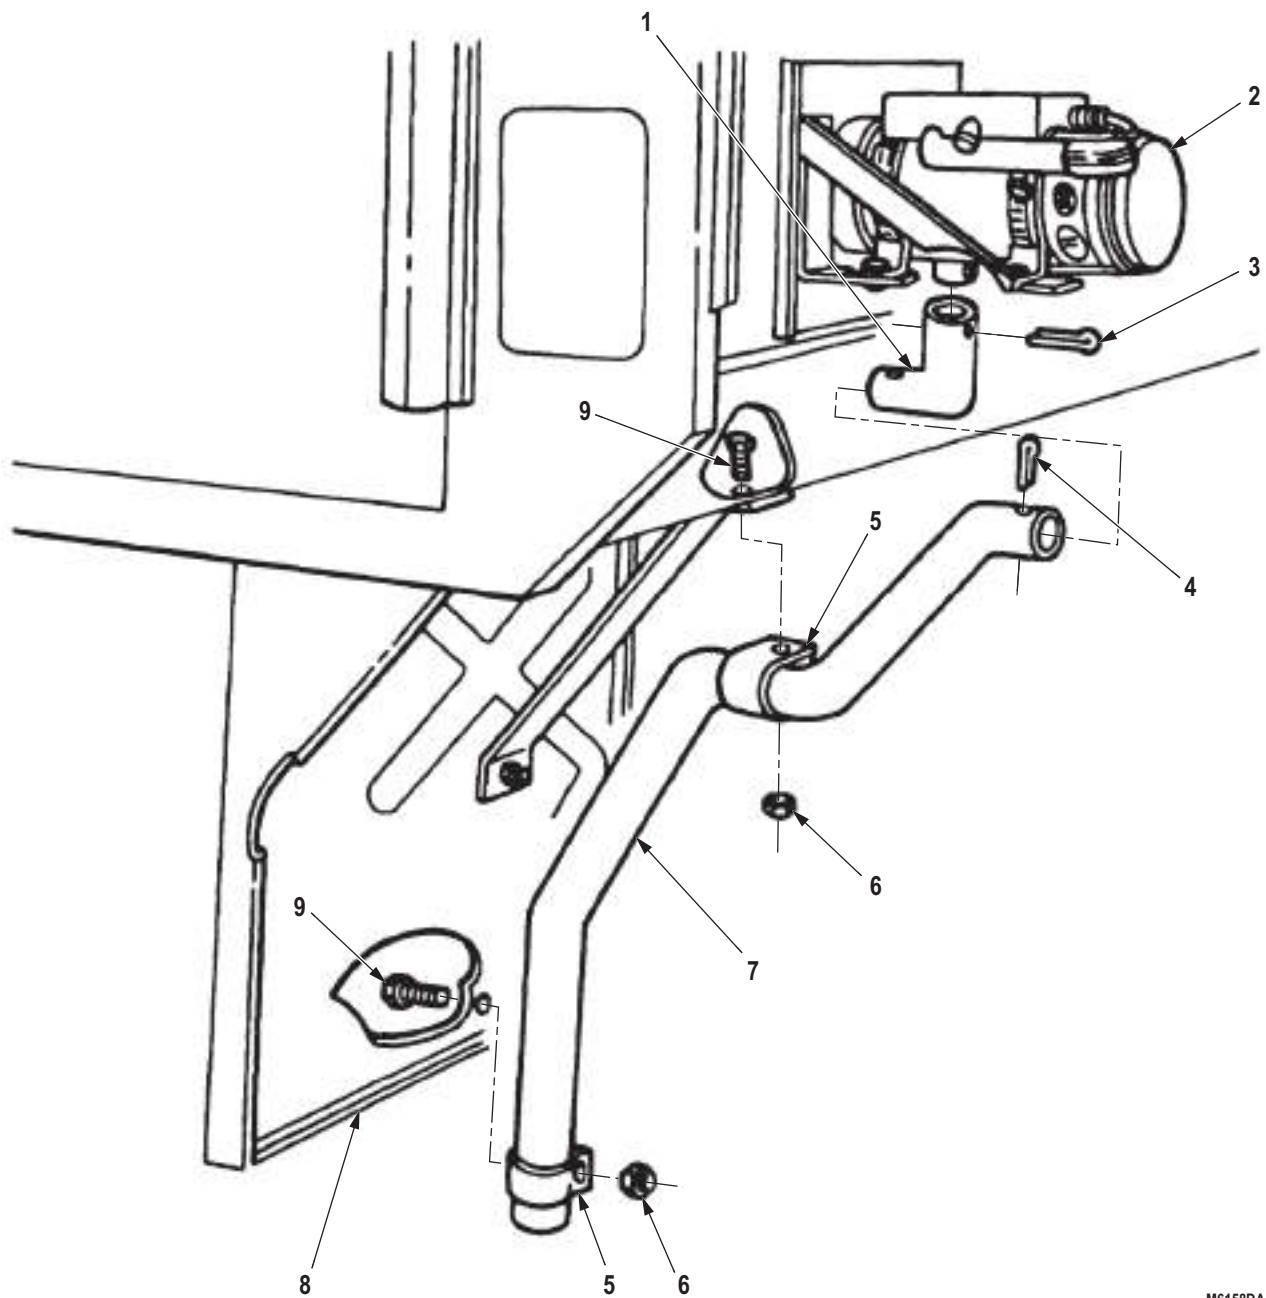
Fuel Burning Heater Exhaust Tube Removal.
